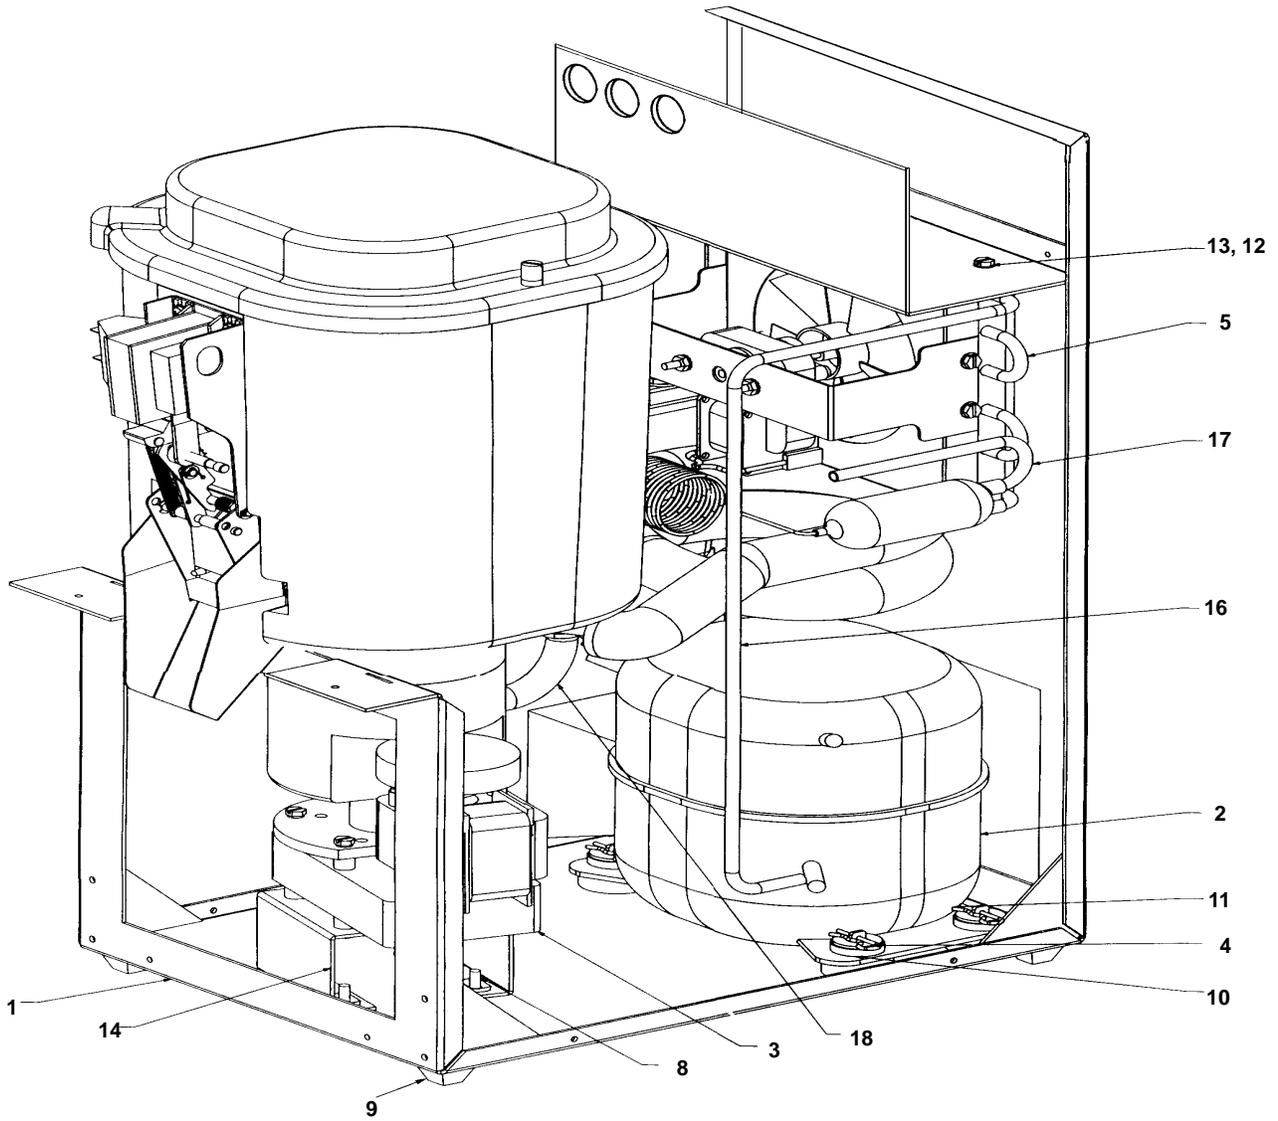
REFRIGERATION & FRAME ASSEMBLY
